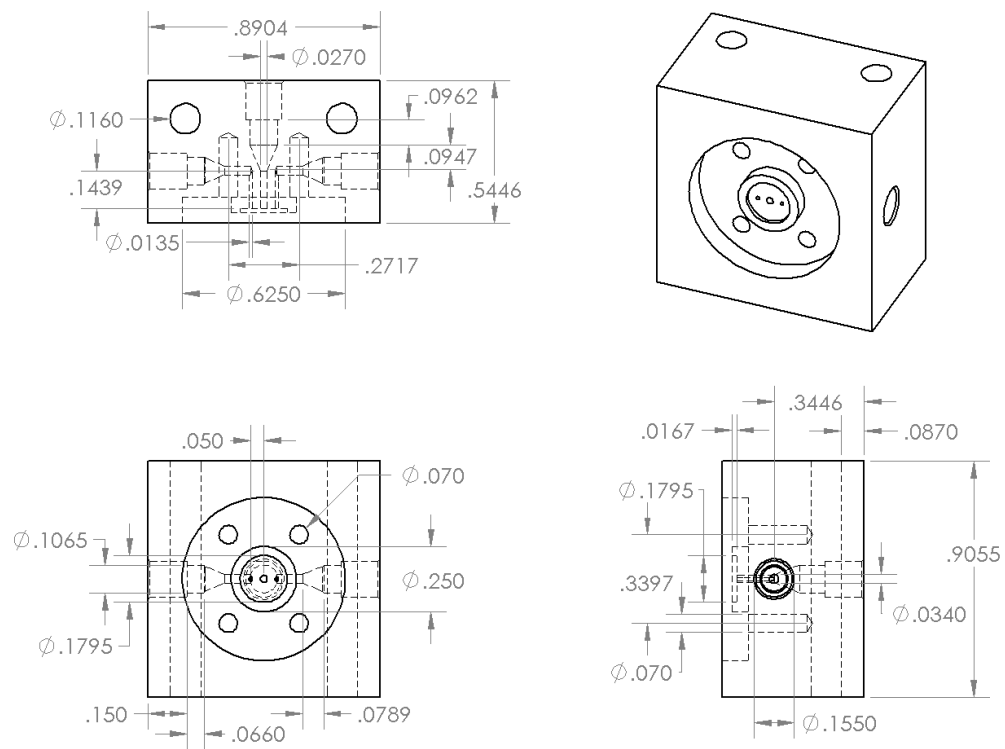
Technical drawing of fiber adapter base. Hidden dimensions are shown as dashed lines. Dimensions are shown in inches.
